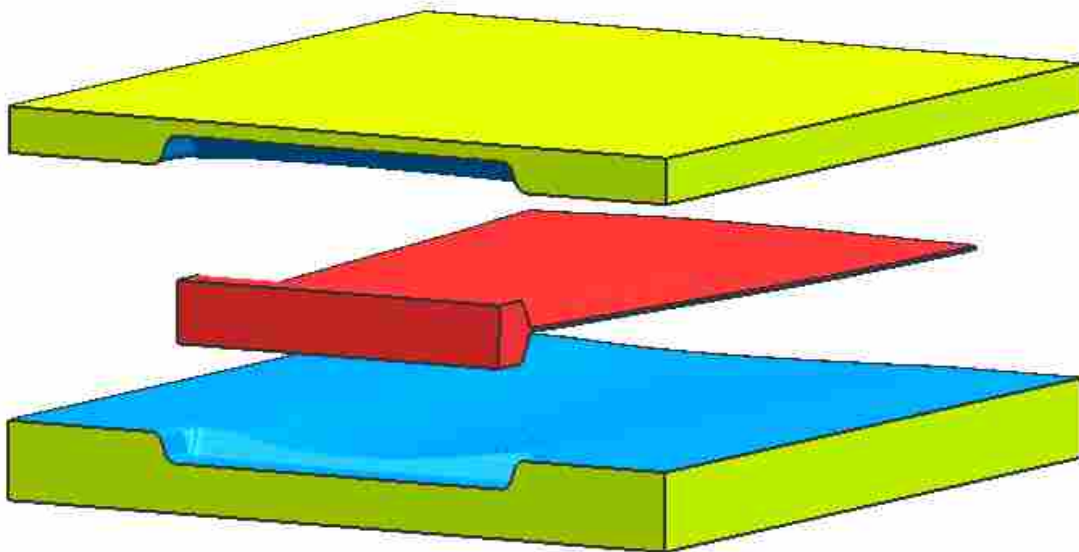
Single and Double Sided Solid Die and Workpiece Geometry
